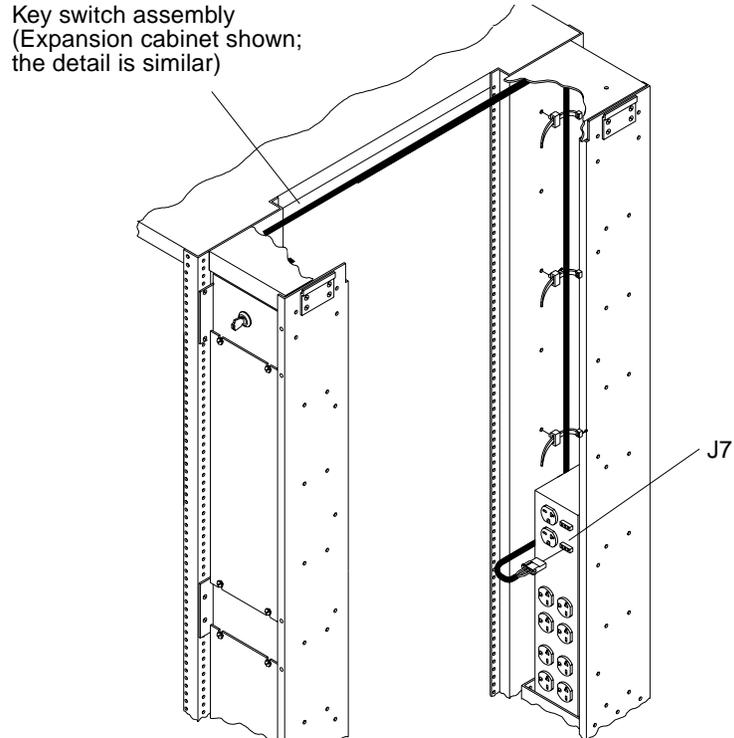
Disconnecting the Key Switch Power Connector — One Piece Assembly
